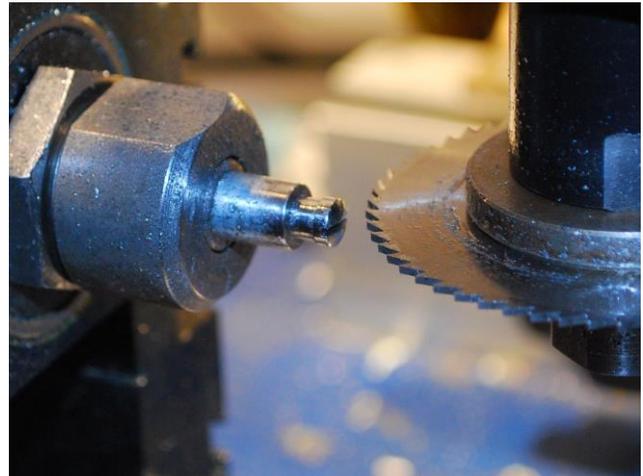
Cutting the screw slot with a .035" slitting saw blade. The lathe headstock is locked with an index plate during this operation.
